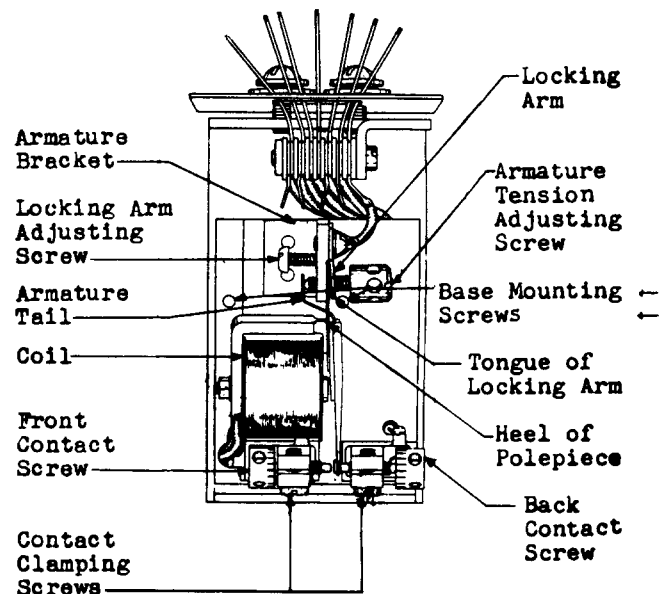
Nos. 267A and 267B Relays Equipped With a Locking Arm Adjusting Screw - Top View
